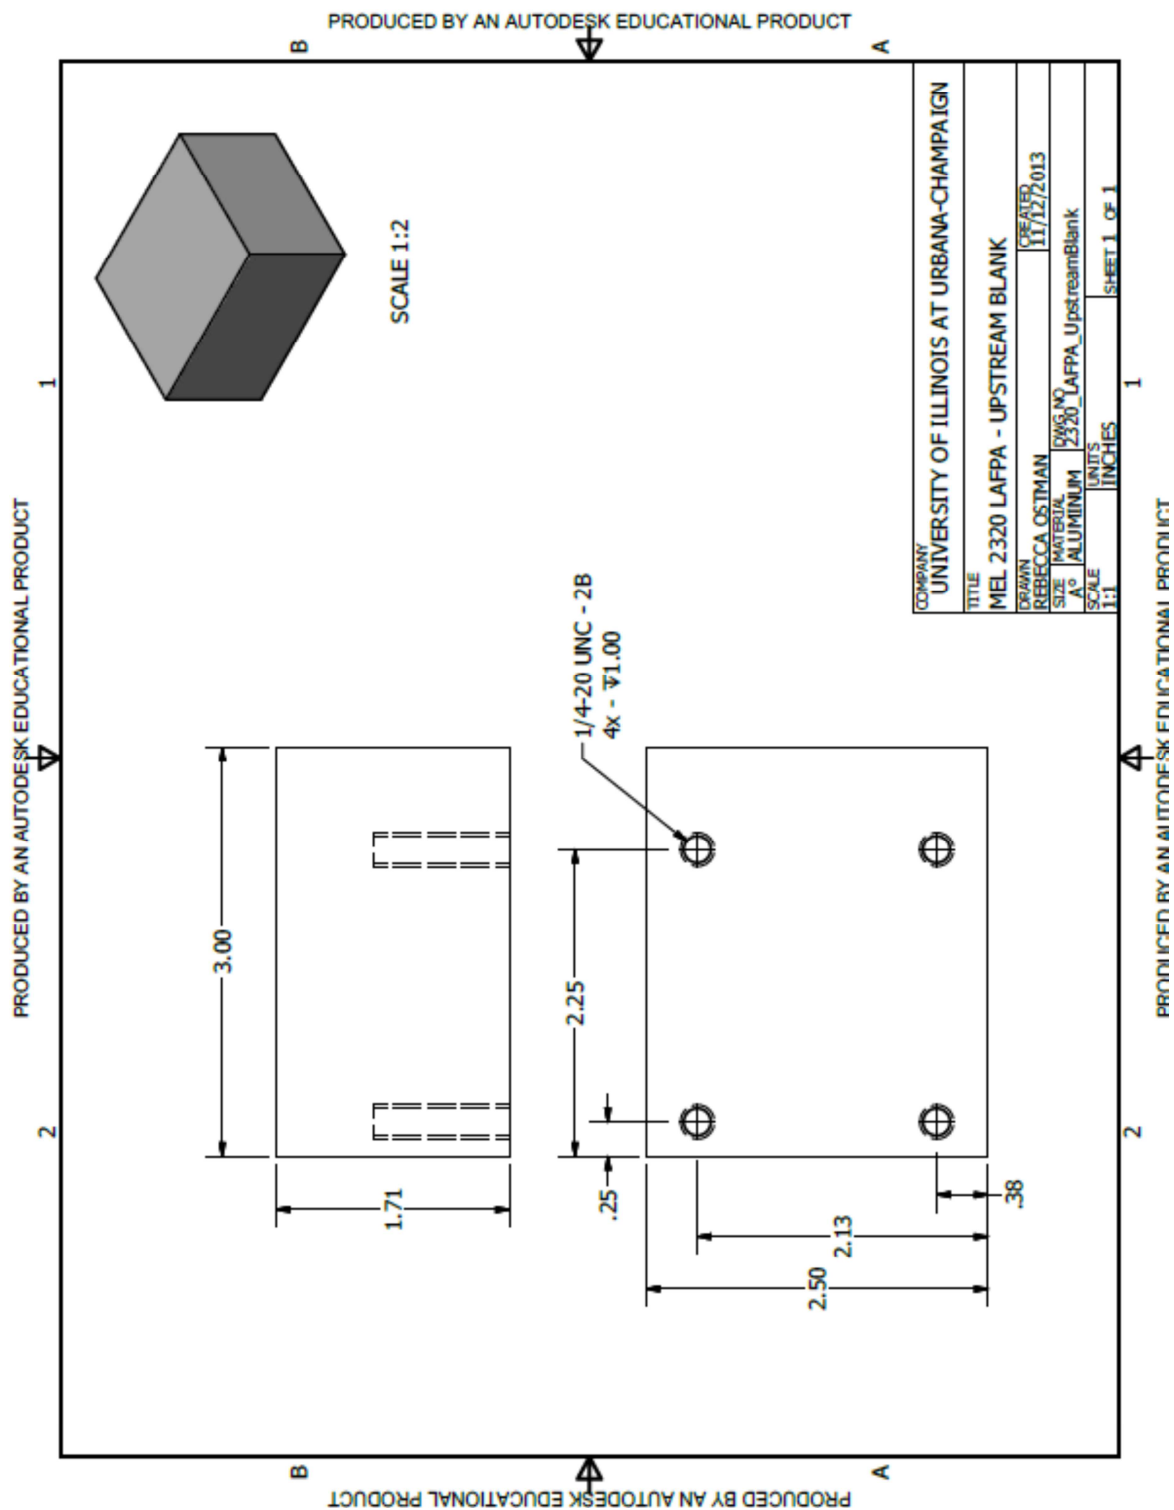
Drawing and specifications for the blank spacing block for the LAFPAs on the ramp corner assembly.
